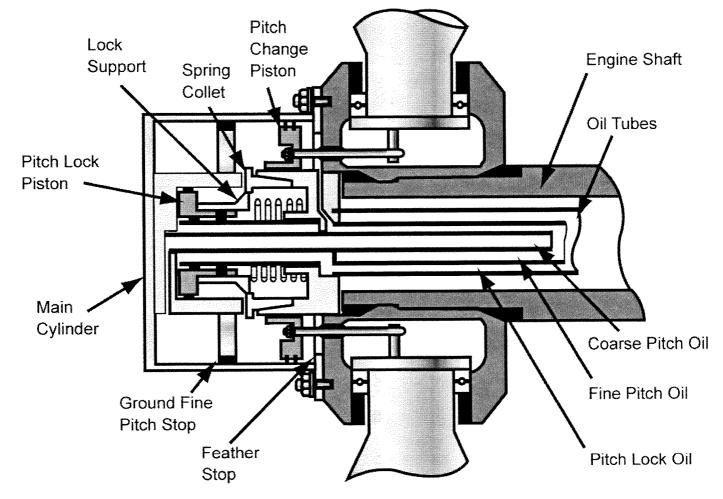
Double acting propeller mechanism, with fine-pitch lock
